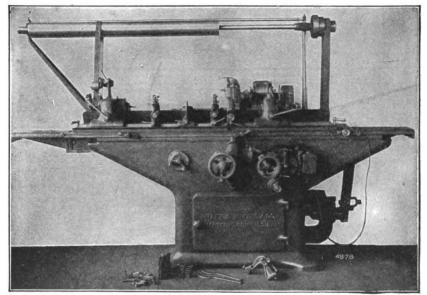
Pratt & Whitney automatic sizing grinder.
